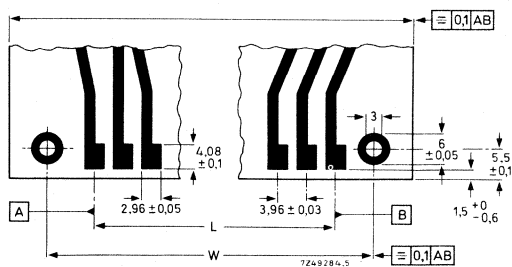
Recommended dimensions of the printed-wiring board; see Table 3 for dimensions L and W.
